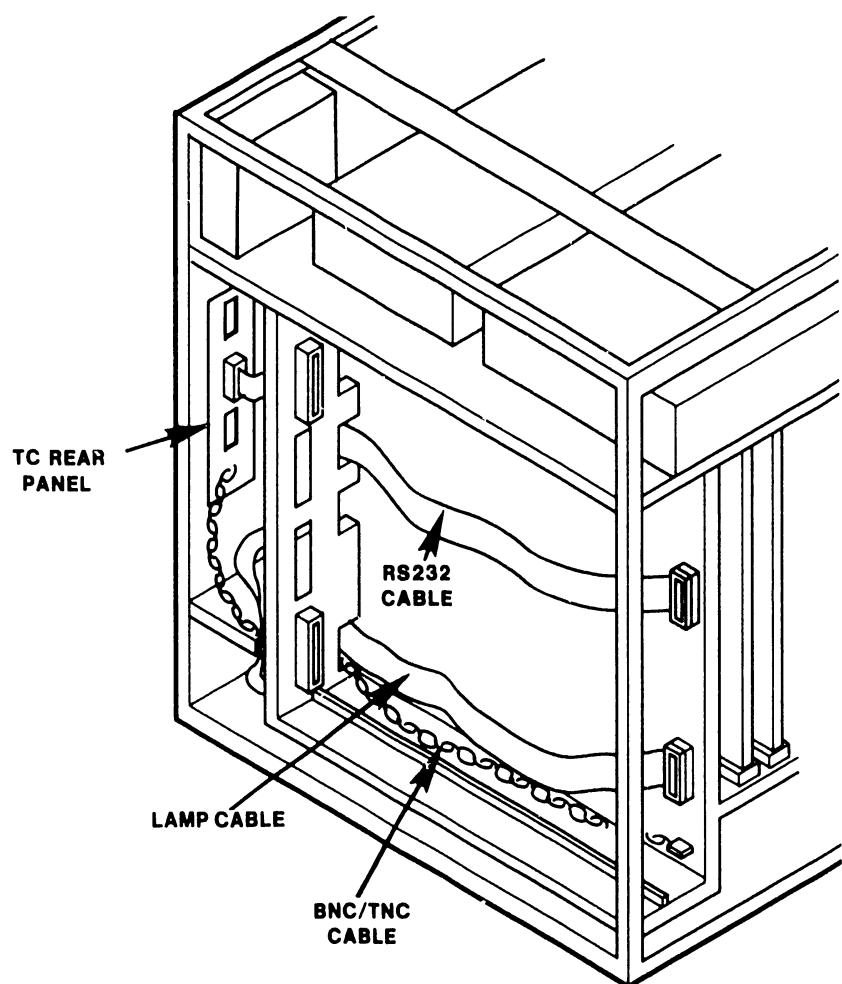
TC Lamp Board Cable Routing (bottom side frame slot)
